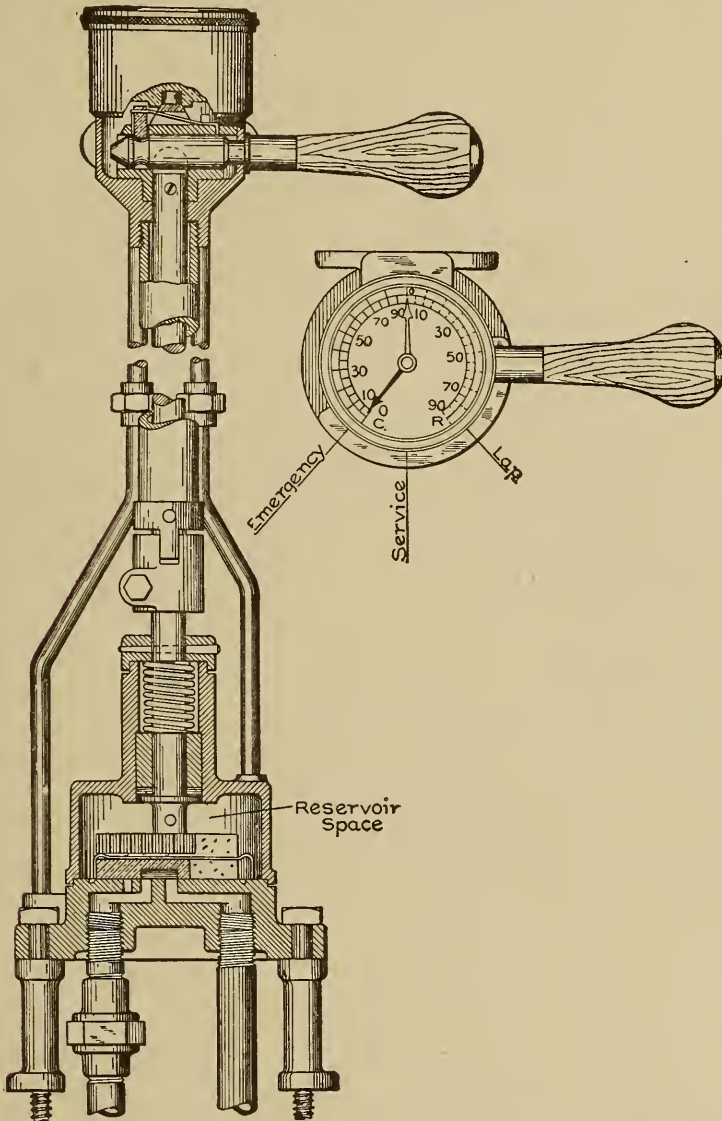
Type of Operating Valve with Handle and Valve Parts Separate. Westinghouse Straight Air-Brake System.
